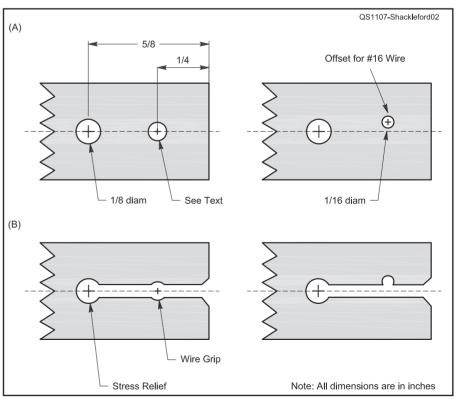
Spreader end detail. At (A) is placement of stress relief and wire grip holes. The wire grip hole is sized for a firm grip. At (B) is appearance after cutting slot and filing end notch.
